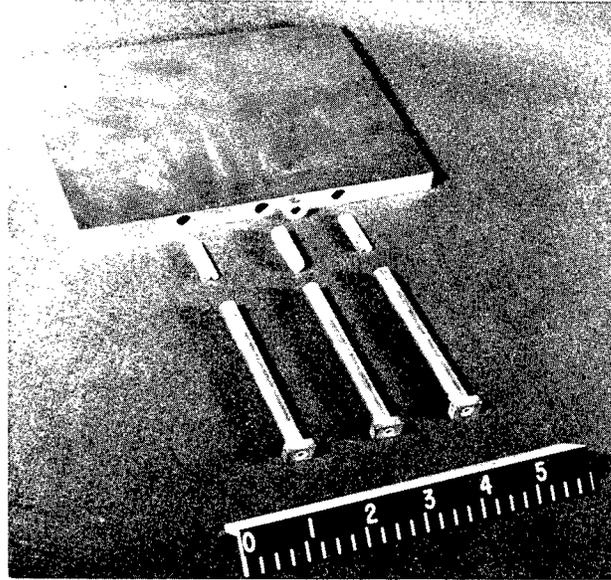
Exploded view of "pocket" plug and flux monitors
